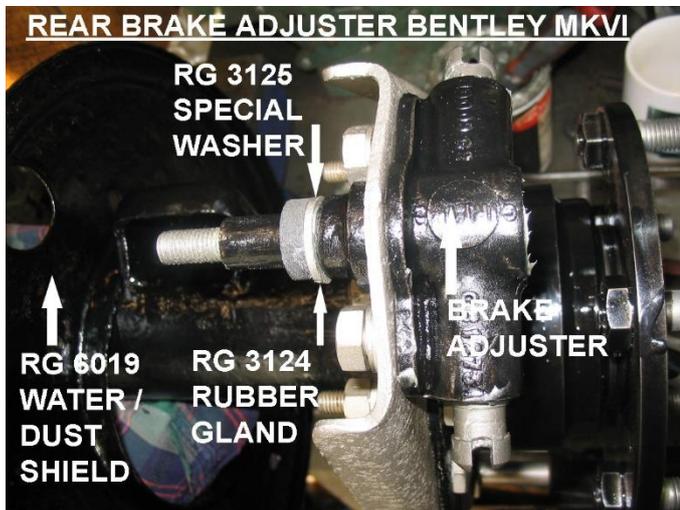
Special washer and rubber gland assembled onto the brake adjuster
